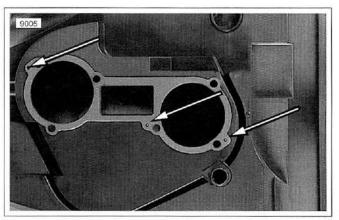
Air Filter Gasket Alignment Pins (3)
